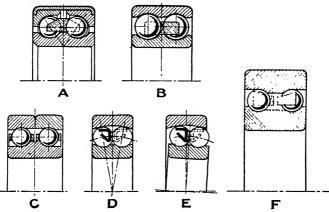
SKF SELF-ALIGNING DOUBLE ROW BALL BEARING
